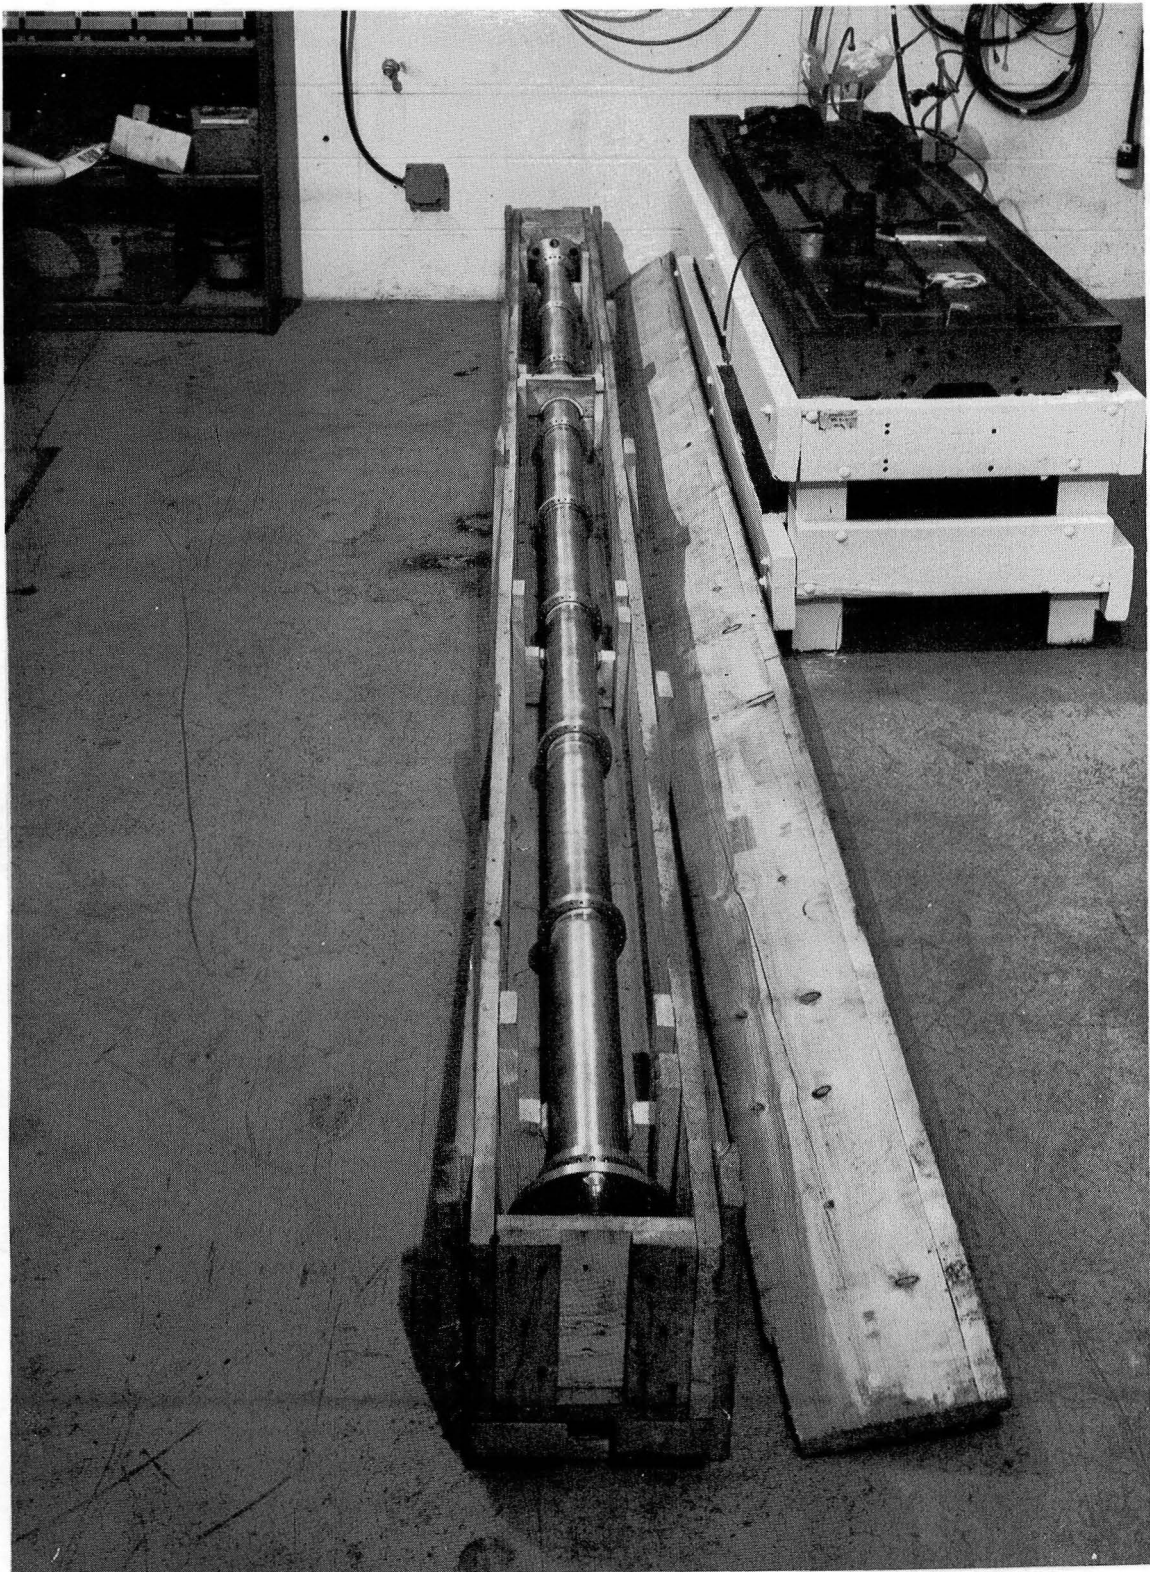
Assembled High-Speed Test Shaft for Supercritical Shaft Test Rig
